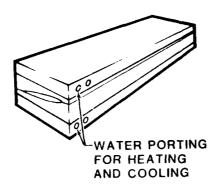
Sculptured Mold Inserts and Ported Platens for Water Heating and Cooling.
